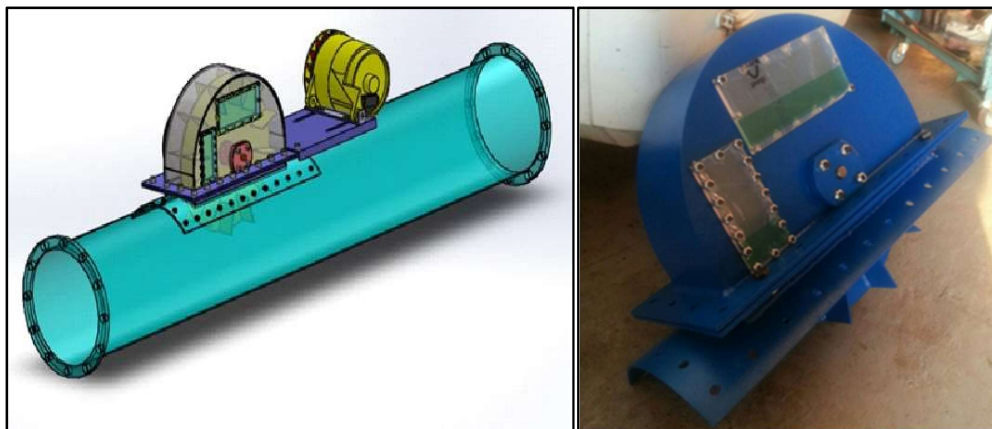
Inline pressure wheel 1 (IPW1, prototype 3)
